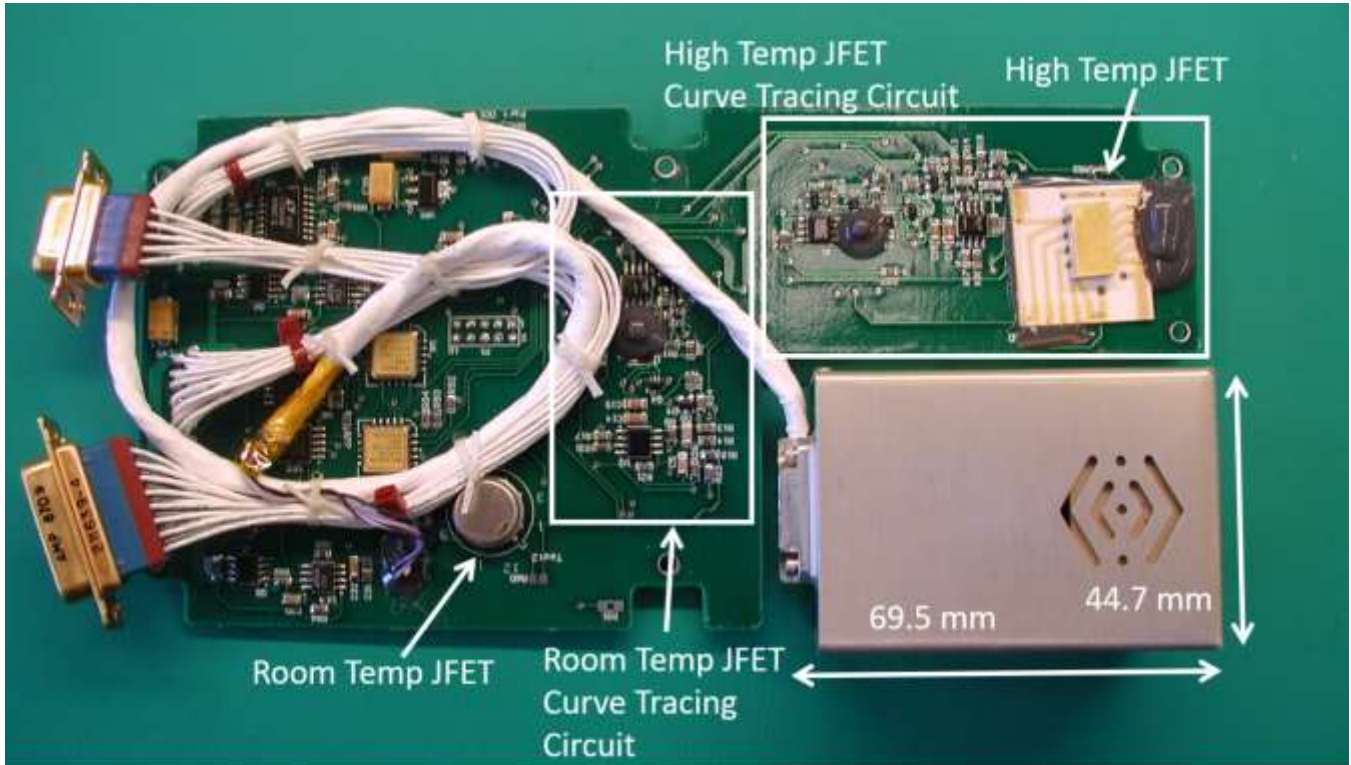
Photograph of flight circuit board incorporating two JFET transistor curve tracing circuits. The microcontroller is mounted on the bottom of the printed circuit board and is not shown in the photograph.
